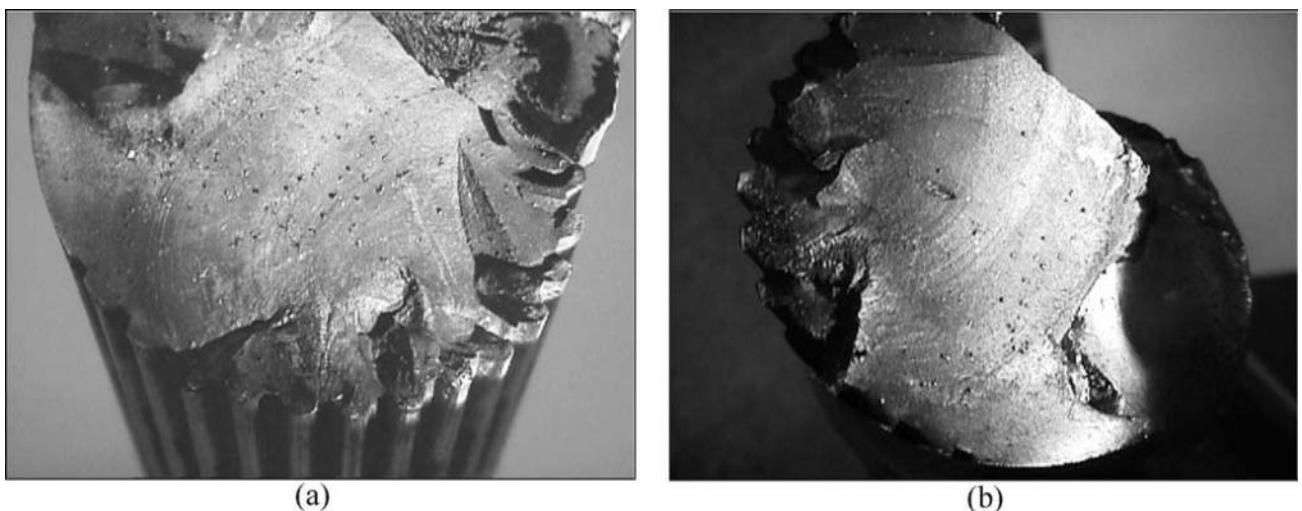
(a) and (b) show the fractured surface of the failed propeller shaft macroscopically [Arisoy et al (2003)].
